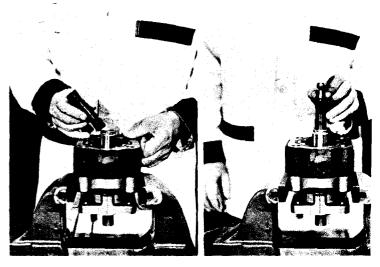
Installing connector shaft, stud, spacer, and lock nut
